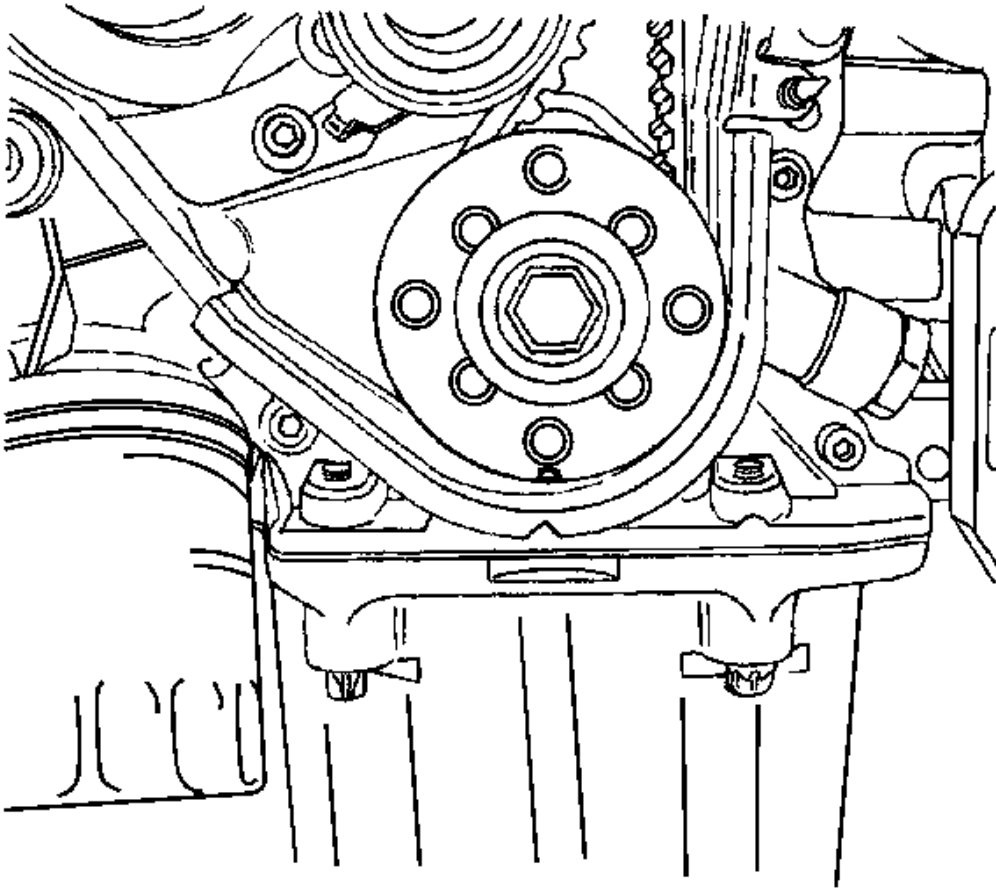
View Of Crankshaft Gear Bolt And Timing Notch
